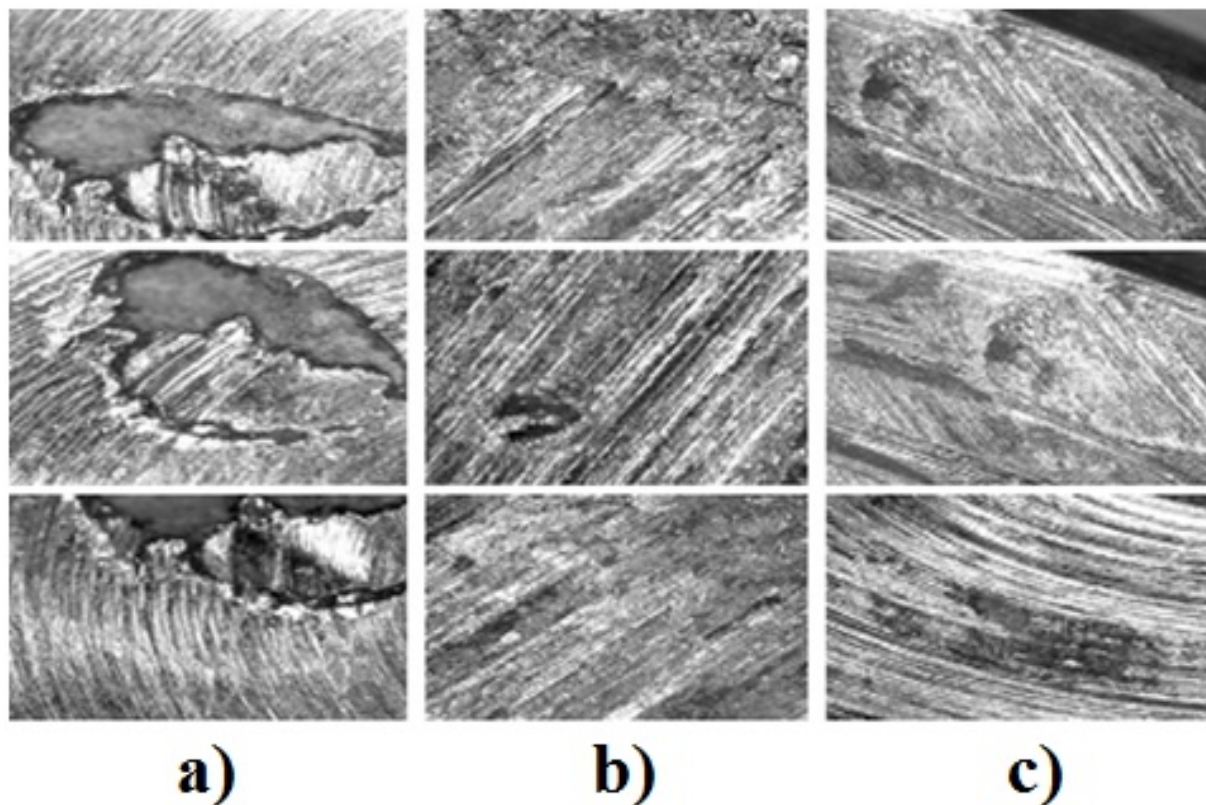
Example of surface of specimen after test: a) made with traditional MIG surface welding method, b) made with MIG surface welding method with micro-jet cooling by argon, c) made with MIG surface welding method with micro-jet cooling by nitrogen after test
